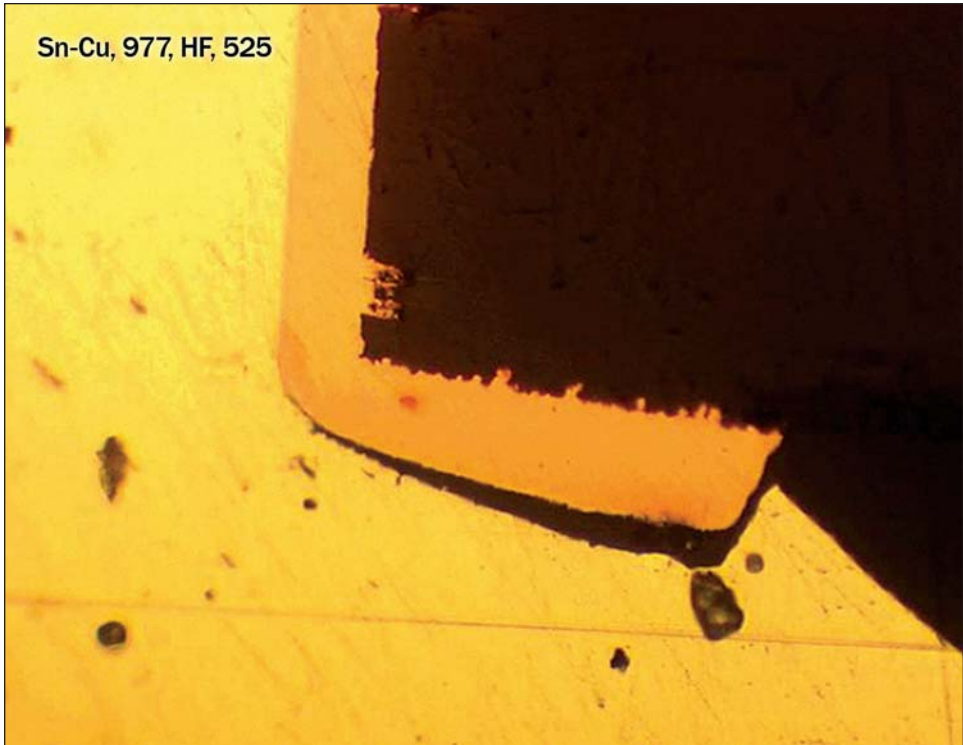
Lead contamination of solder joint for gull-wing SMT component [9].
